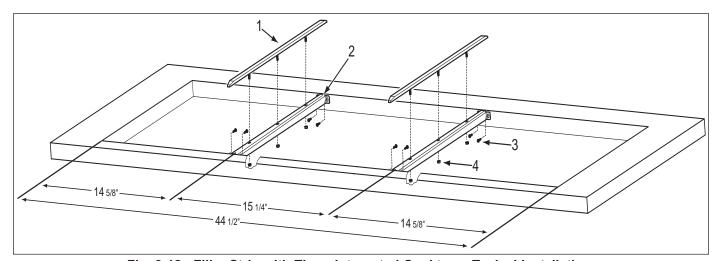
Filler Strip with Three Integrated Cooktops, Typical Installation.
